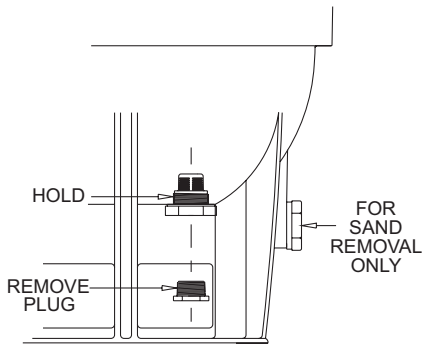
Hold drain fitting and remove drain plug to drain filter.
